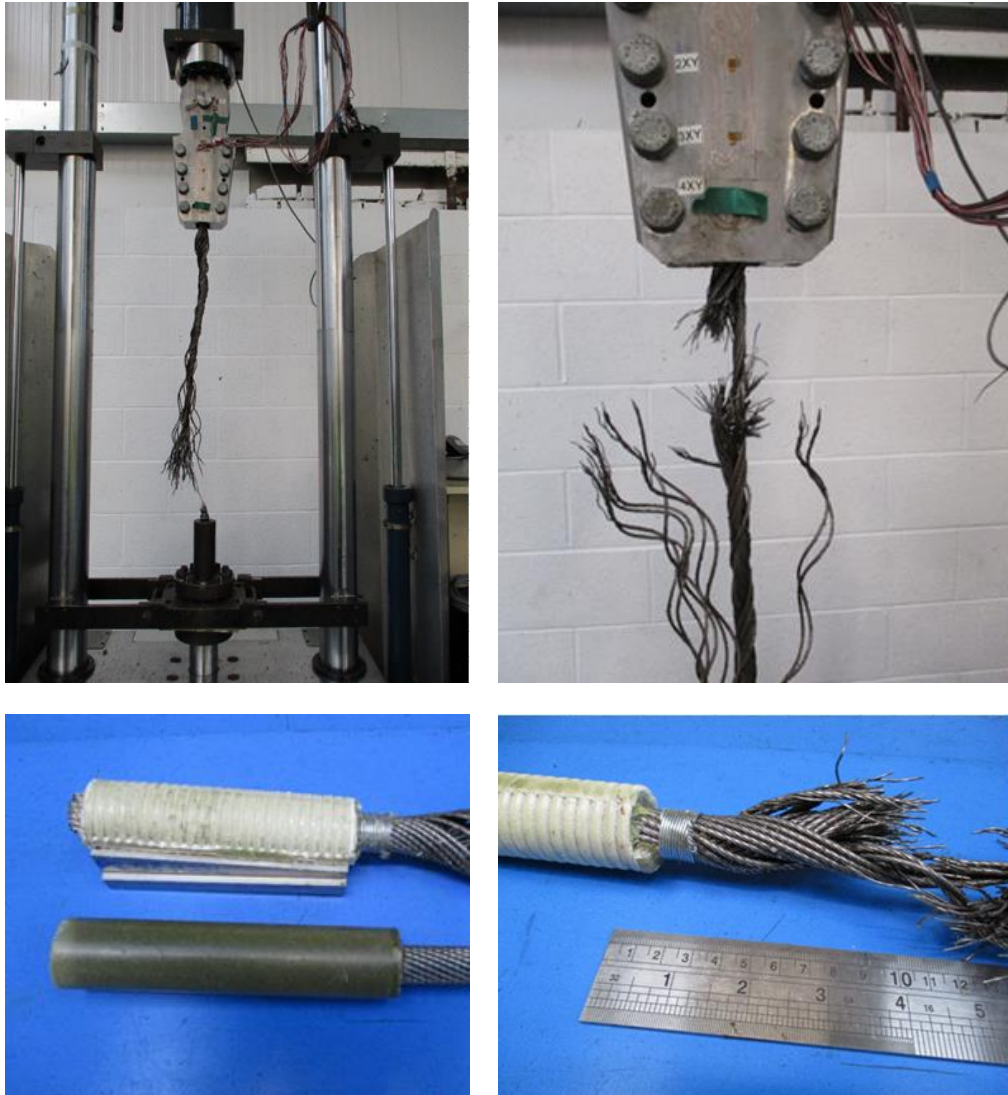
Showing samples of Verotop wire rope construction terminated with resin sleeves after tensile testing to failure. Failure location was clear of the wedge fittings.
